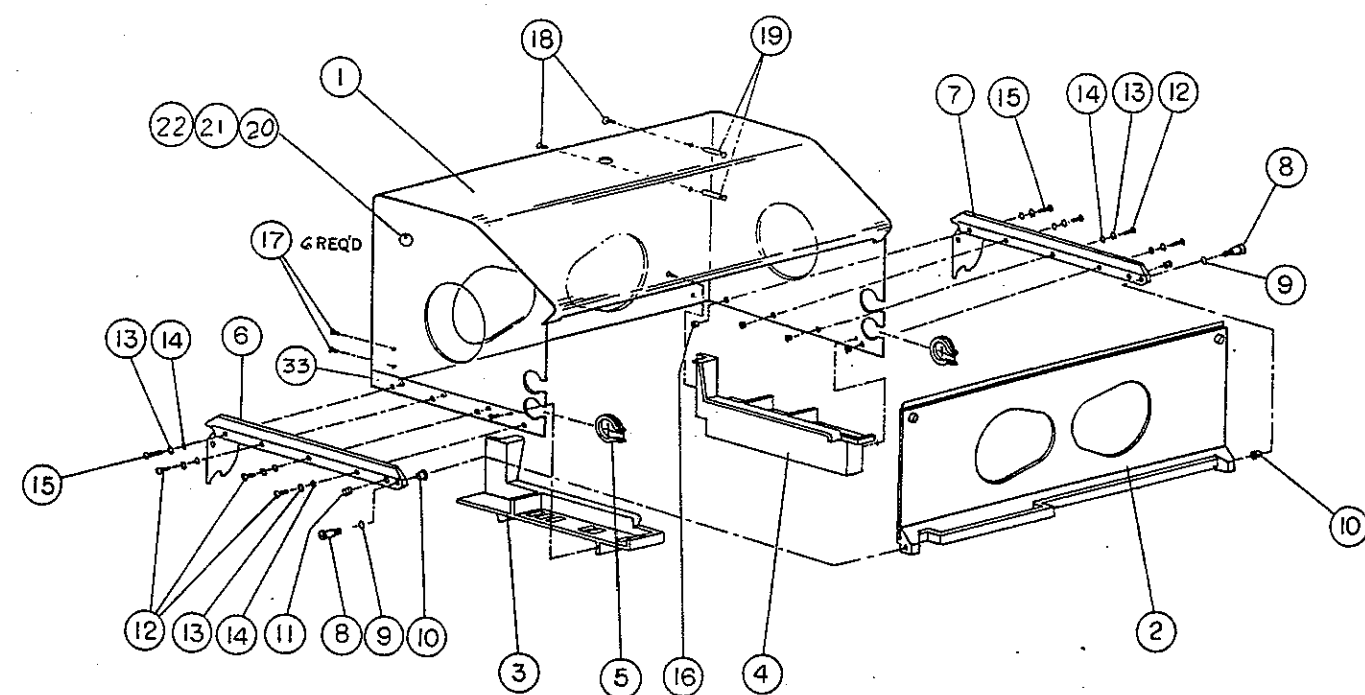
PARTS LOCATION DIAGRAM, HOOD ASSEMBLY
